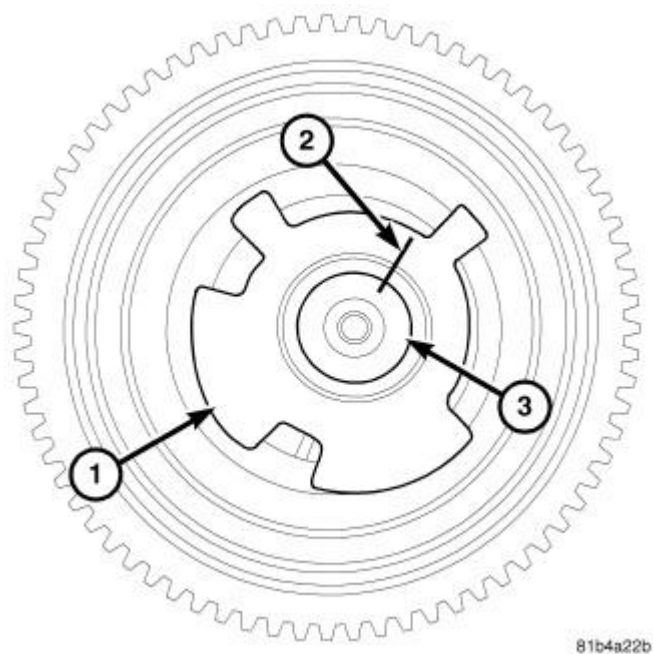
Mark Across Reluctor Wheel & Exhaust Camshaft
